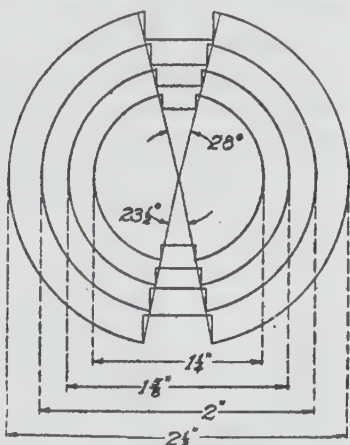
SECTIONS OF FLUTED SHAFTS TESTED.
